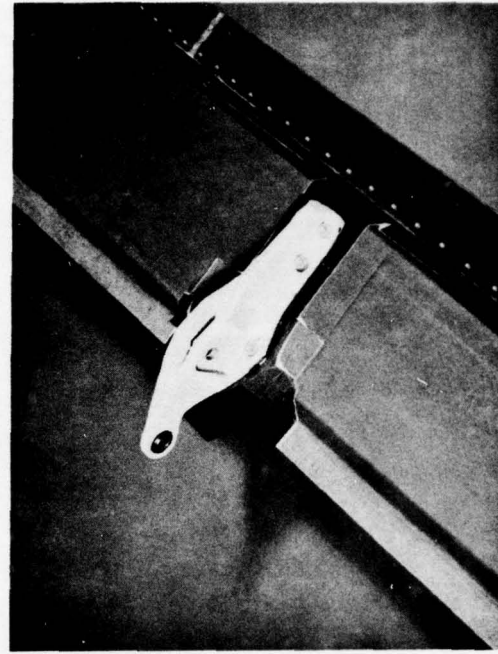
OUTBOARD HINGE ASSEMBLY INSTALLATION
